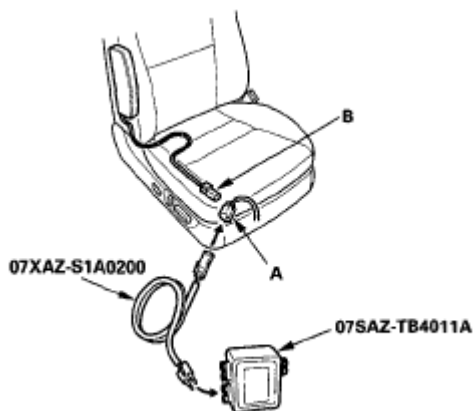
Identifying Right Side Wire Harness 2P Connector And Front Passenger's Side Airbag
